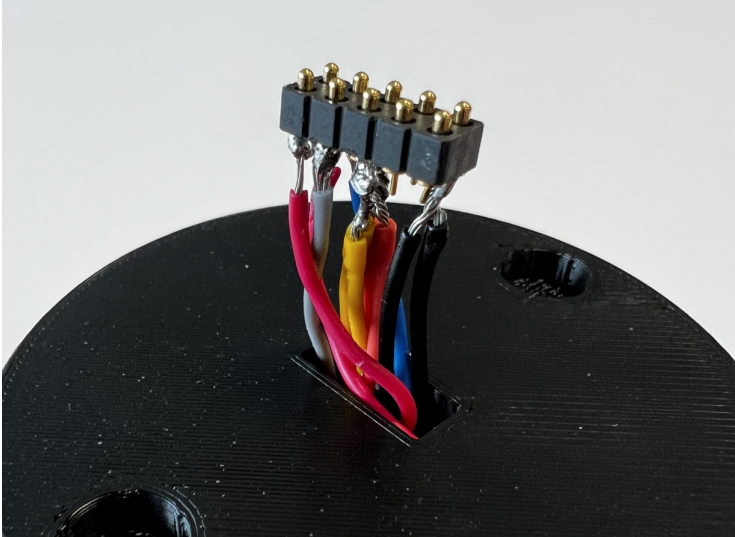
Pogo pins soldered to wires before being inserted in the accessory.
